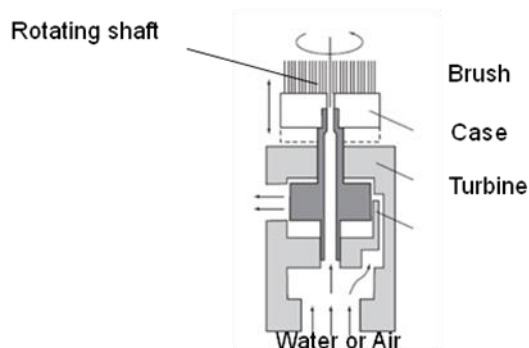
Bearing used for the rotating shaft sliding part of the sensor cleaning brush
